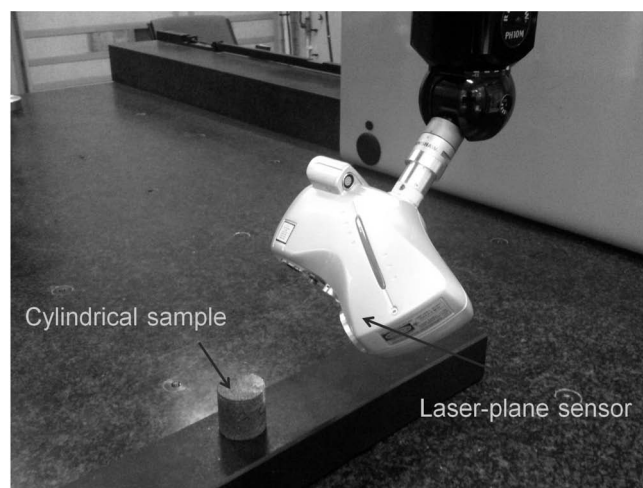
The laser-plane sensor mounted on the 3D coordinates measurement machine (Renault Automation 13–8-6 motorised CMM) used to measure the dimensions of the samples before and after corrosion testing. The sample is about approximately 30 mm in diameter.
